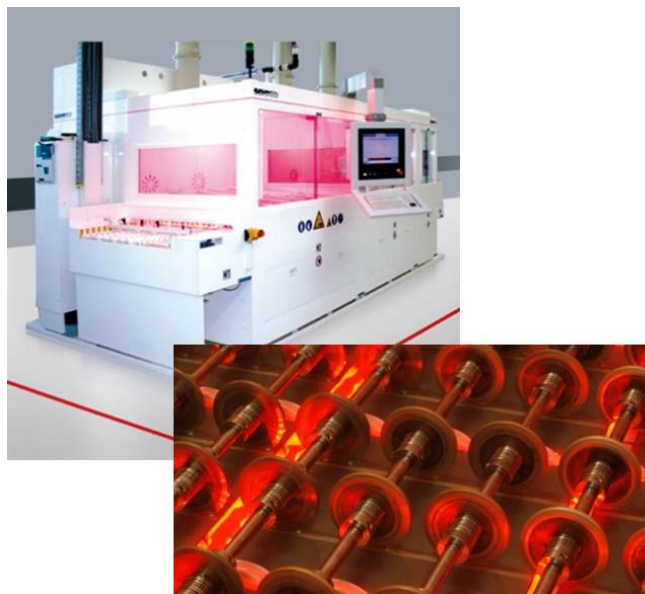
Schmid galvanic tool "LIP" in- and out-side view
